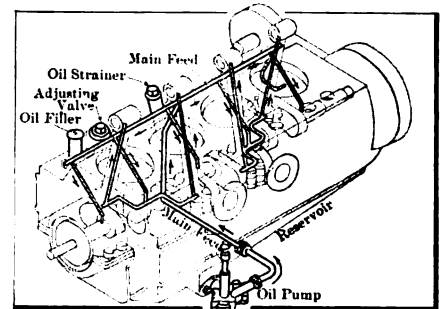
Showing oil leads on the Knox cars using force-feed system
